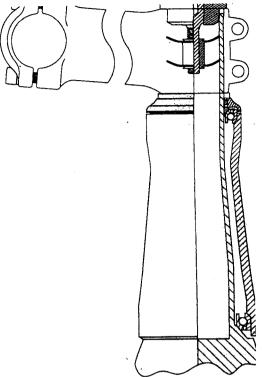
Threadless headset with blended standards: 1-1/8" at the top of the head tube and 1.5" at the bottom of the head tube
